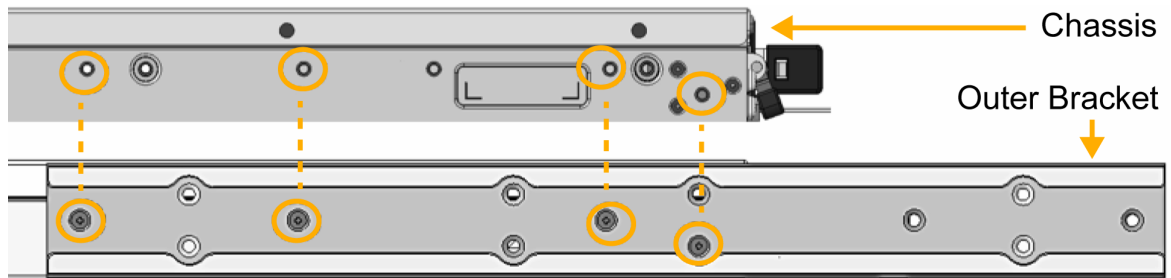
Aligning Outer Bracket with Chassis Holes
